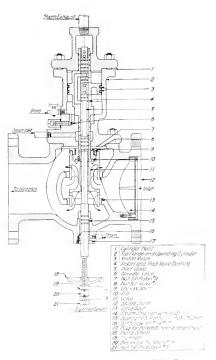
Assembly of Valve Gear Pilot Valve Type Type "L" Curtis Steam Turbine
